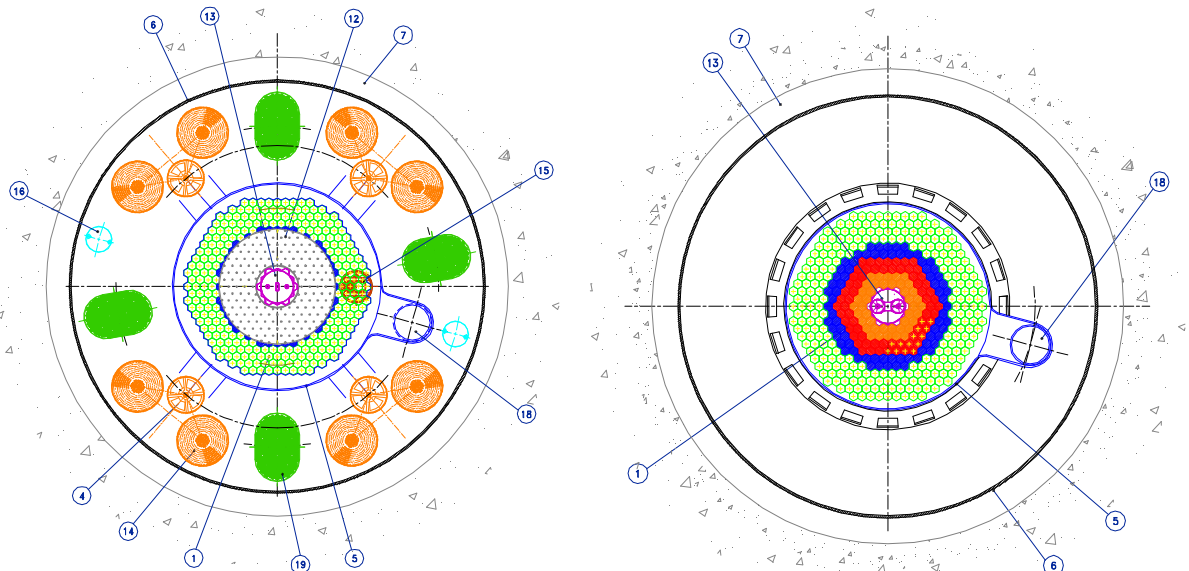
EFIT Primary system assembly: horizontal section over the core and at core elevation.
